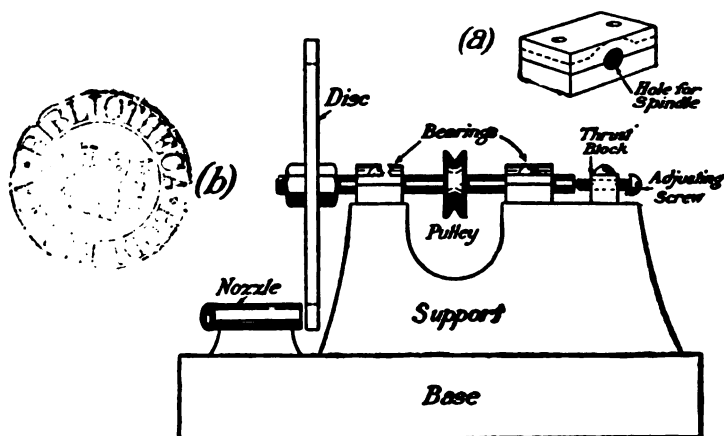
(a) Bearing for turbine. (b) End view of turbine: nozzle not shown.
